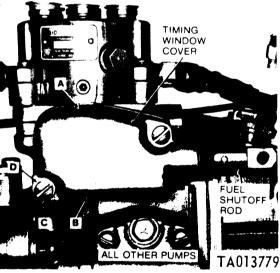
Installing timing window cover and fuel shutoff rod assembly or solenoid assembly,
